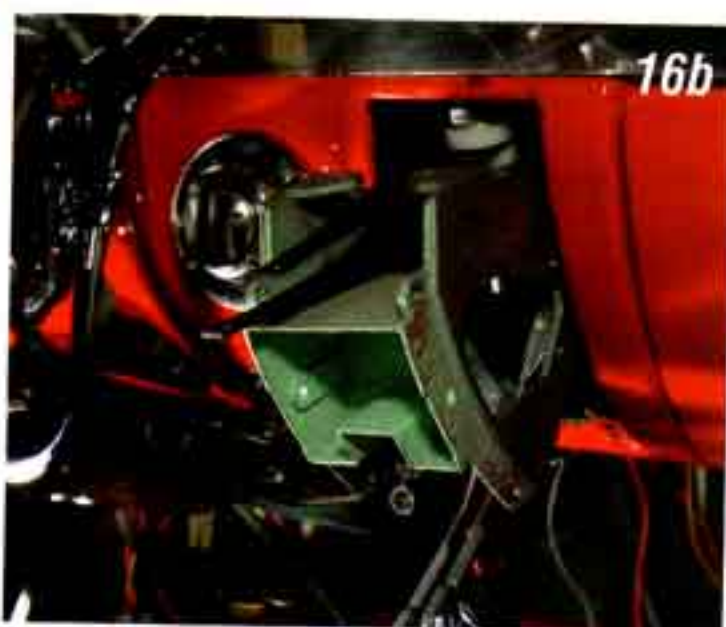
, 16b & 16c: Plug the wiring harness into the control panel and pass the unit through the glove box opening and back through the dash heater control opening. Install the face plate and knobs, secure the control panel to the dash. Attach the other end of the control panel wiring harness to the plug on the ECU module on the passenger side top of the evaporator. Also plug in the lead from the blower motor to the ECU.
